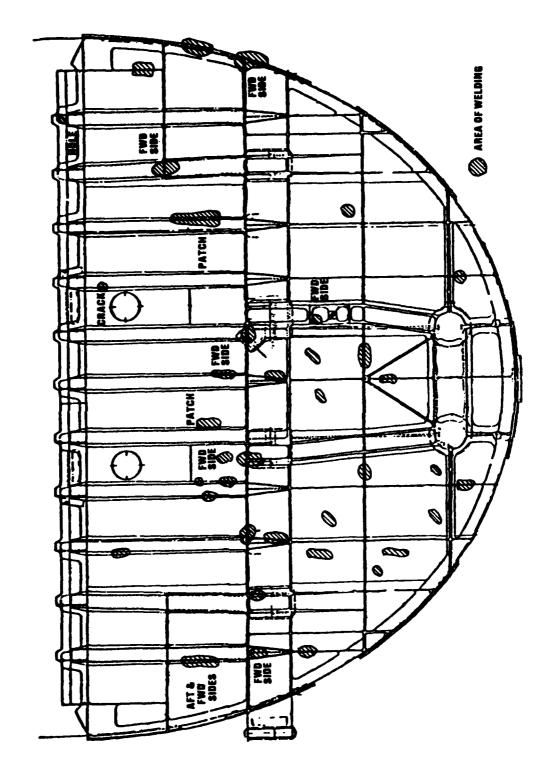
Weld Correction Locations - Bulkhead Casting M07
